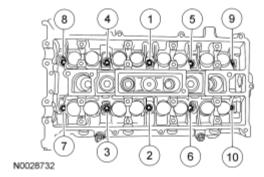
Identifying Tightening Sequence Of Cylinder Head Bolts Courtesy of FORD MOTOR CO.
